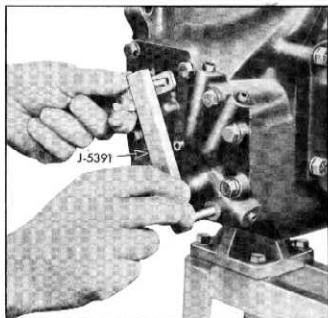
Adjusting Throttle Valve Linkage and Outer Lever
